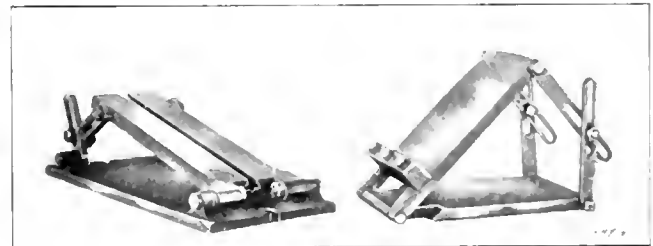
Adjustable Angle-plates for Milling Machine and Drill Press
